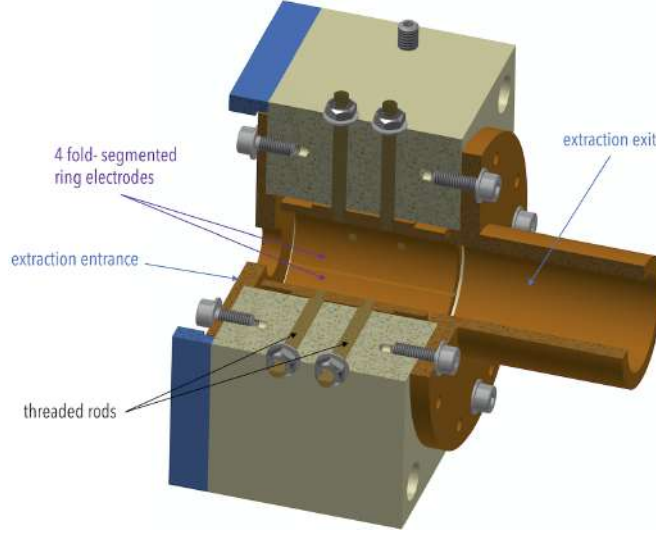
Technical drawing of the extraction module; the 4-fold segmented ring electrode is indicated with purple arrows and is contacted through threaded rods. The flat entrance electrode and cylindrical exit electrode are needed for focussing the beam; the POM-carrier is shown in beige
